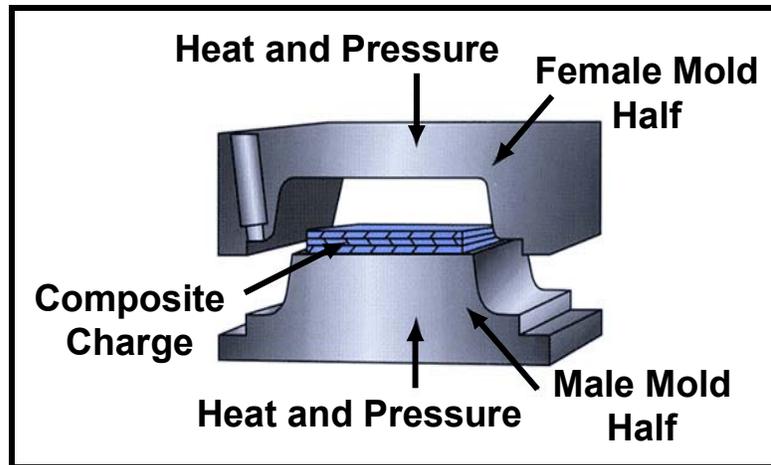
Compression molding schematic heating and pressurizing a composite charge to fabricate a cured composite part
